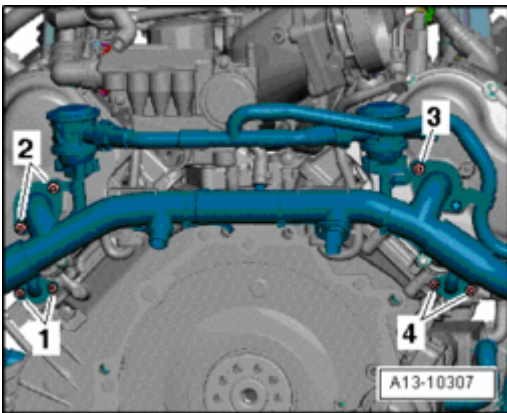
Removing Bolts, Rear Coolant Pipe & Secondary Air Injection Combination Valves
